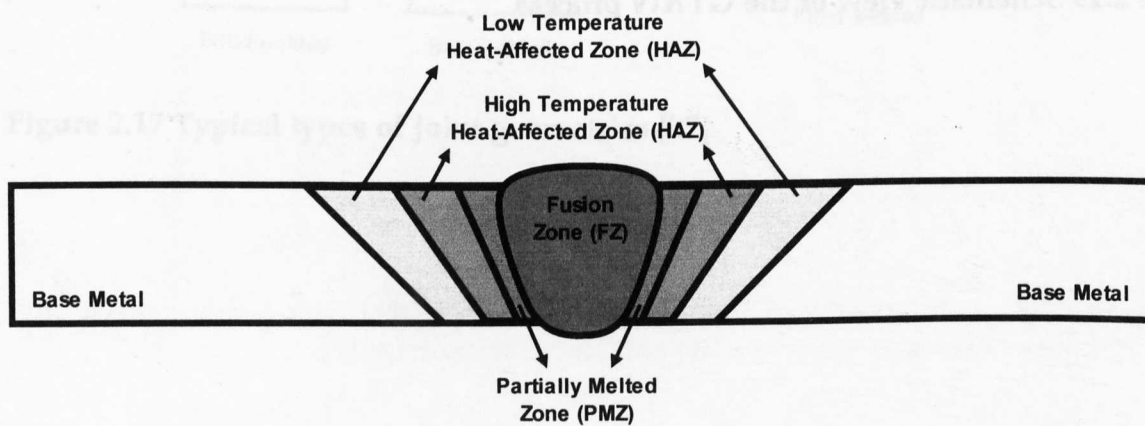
Metallurgical zones in a welded alloy plate
